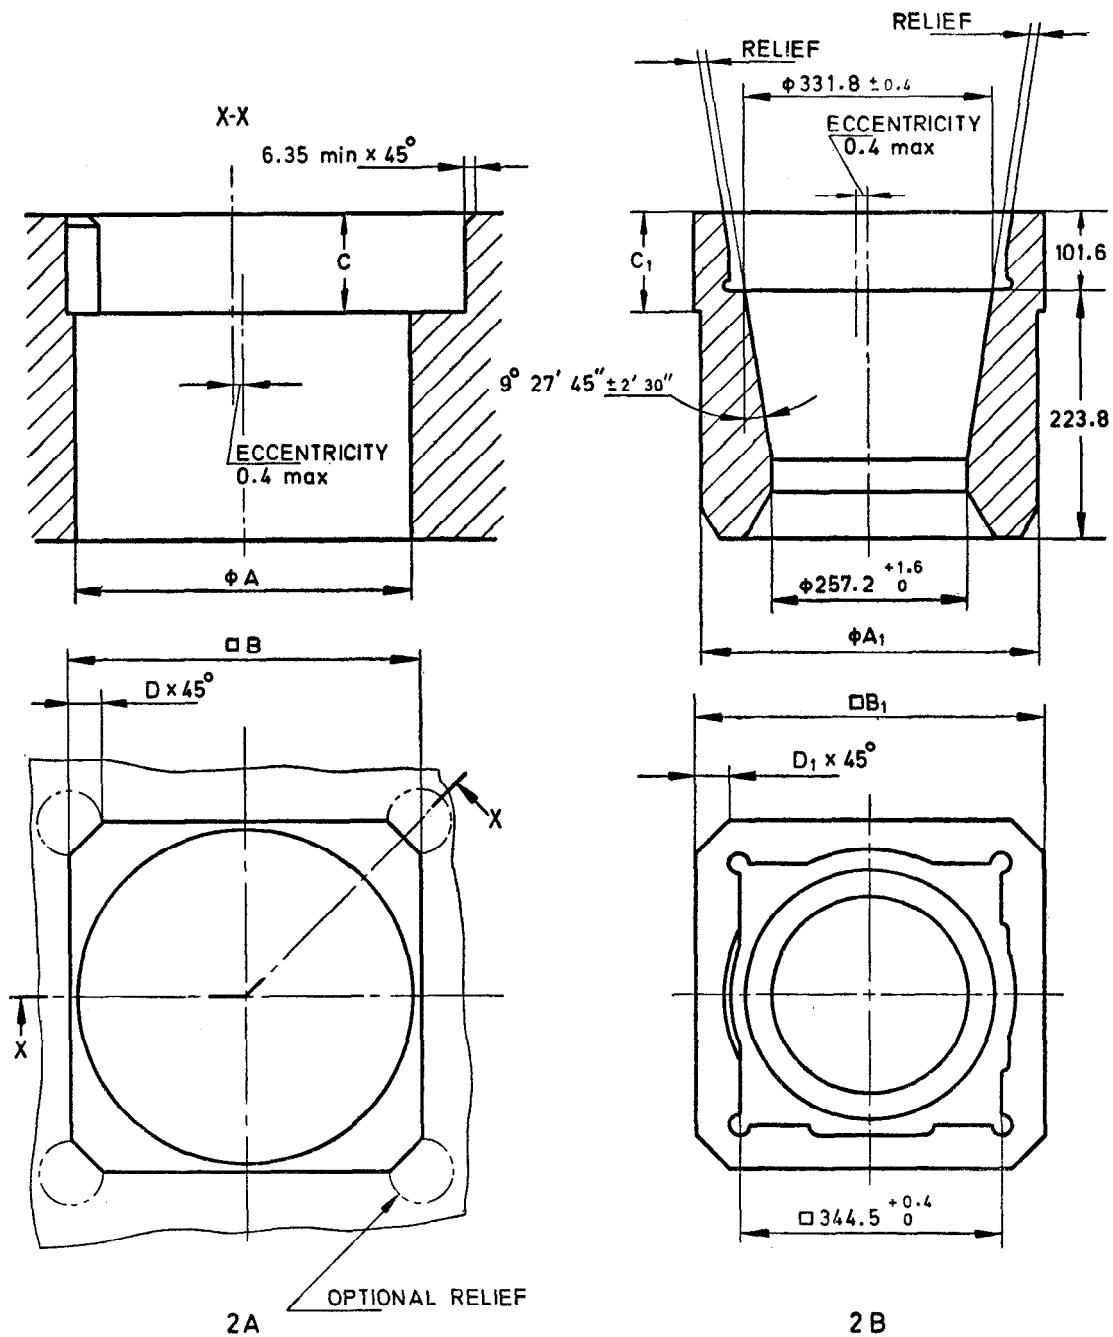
ROTARY TABLE WITH SQUARE KELLY BUSHINGS
